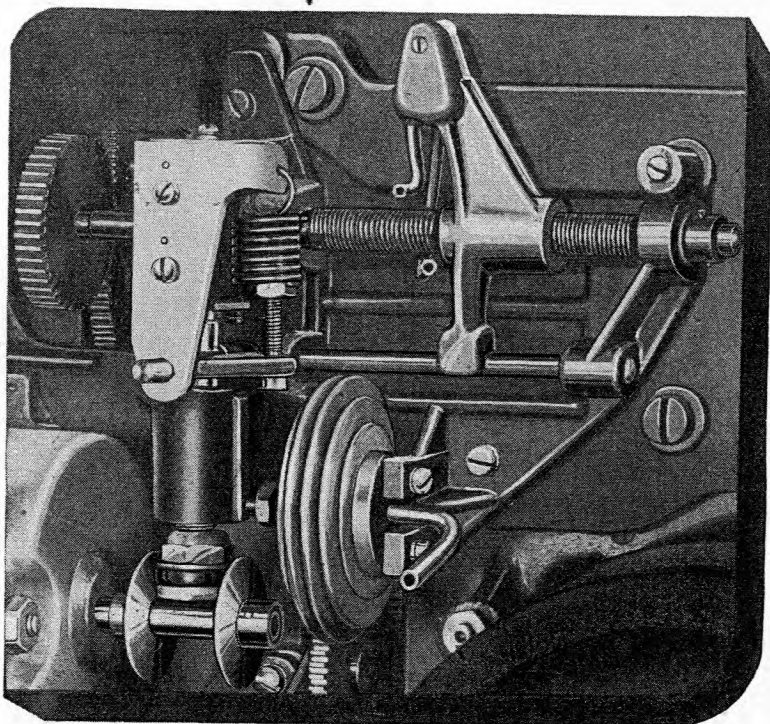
Jet block, spindles, and gearbox of altas unit (compare with Fig. 41 in Chap. 9)
